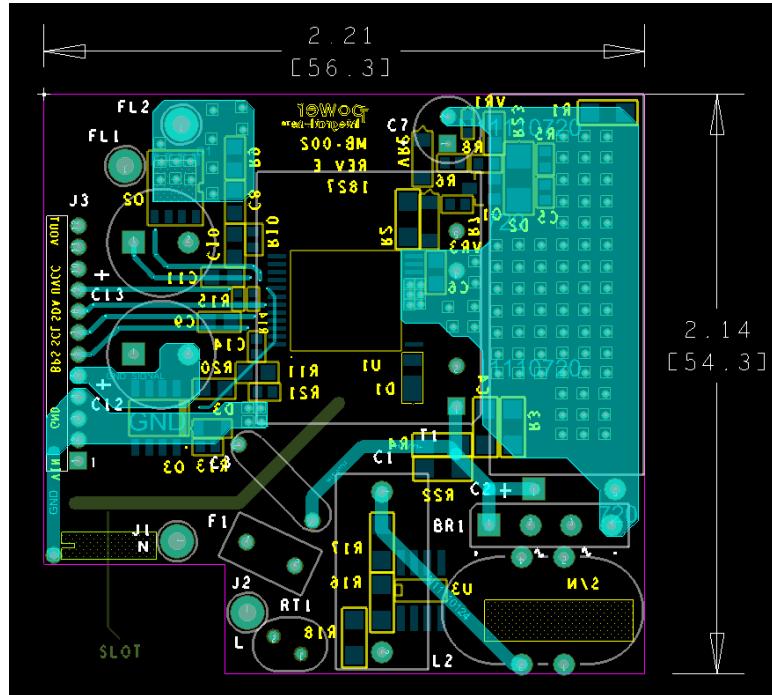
Printed Circuit Layout, Mother Board, Top.
